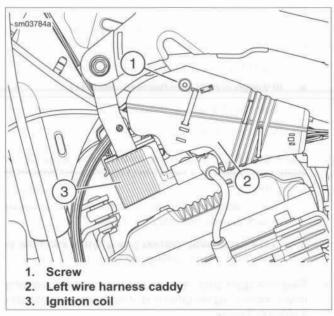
Ignition Coil and Left Wire Harness Caddy
